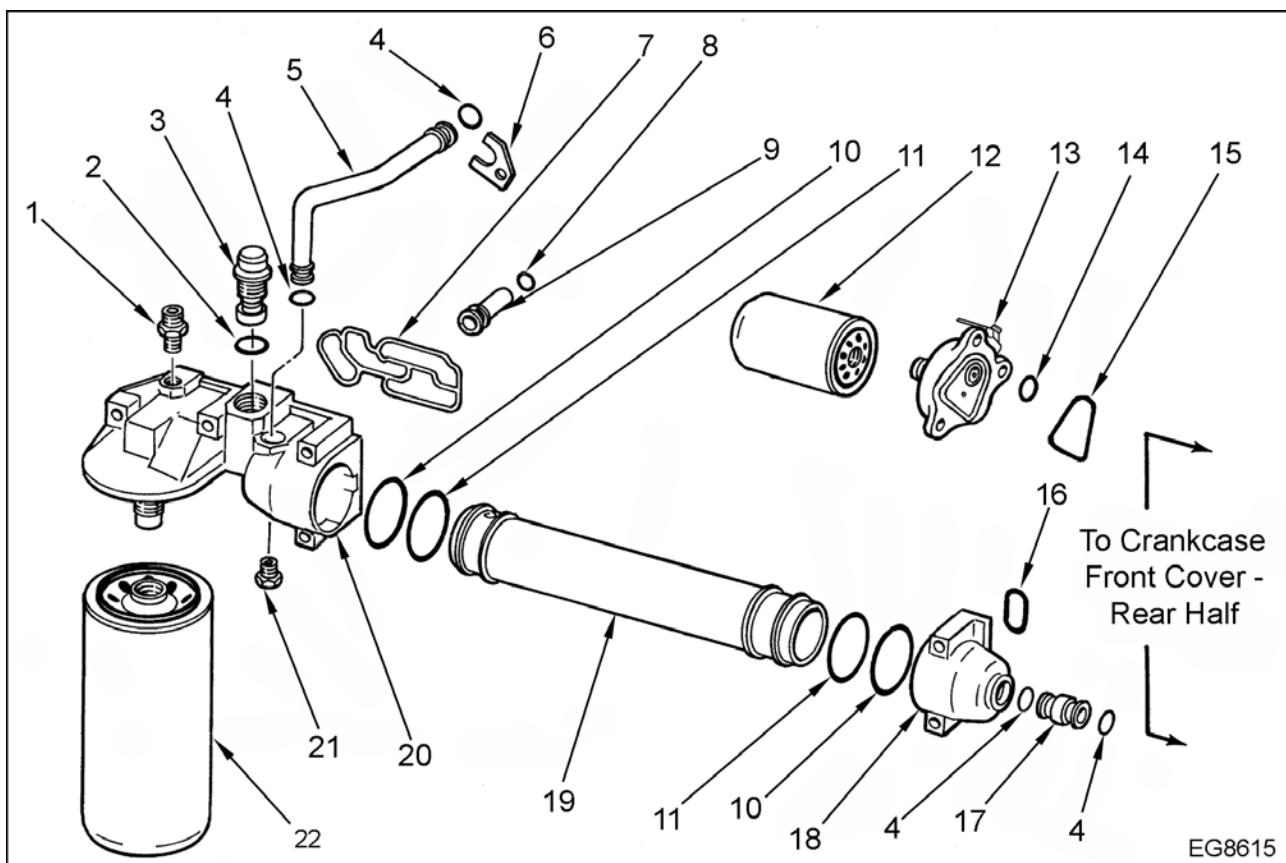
Oil Cooler, Oil Filter, and Coolant Filter
